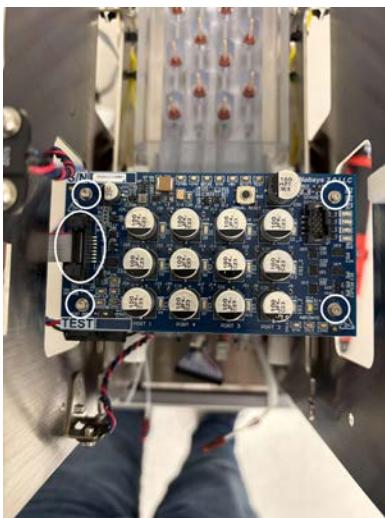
Pump Control PCB with locations of ribbon cable and screws highlighted.
